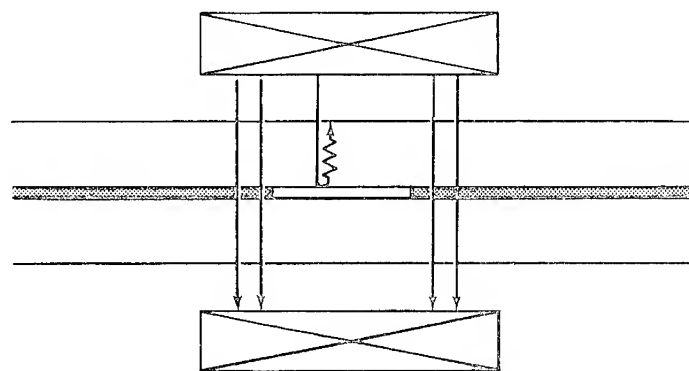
Schematic cross-section view of an adhesively bonded joint.
